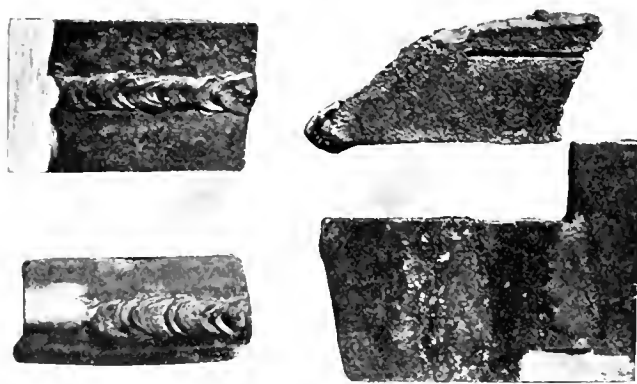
Samples of Steel and Cast Iron Welding, and Cutting done with Oxy-acetylene Flame.
